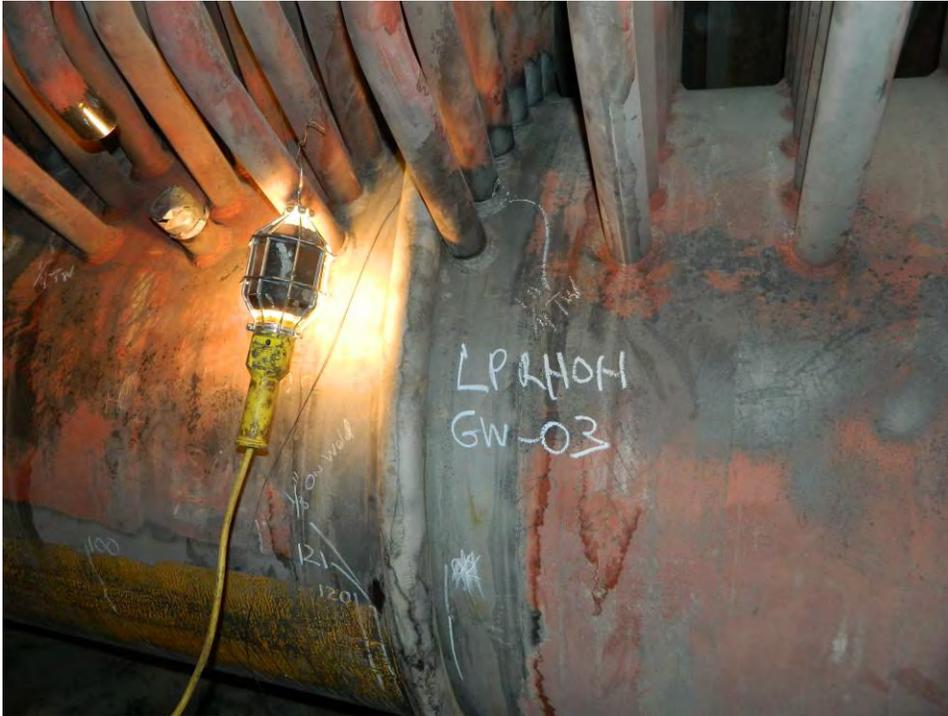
Photographs of the indications on girth weld No. GW-3 of the LP Reheat Outlet header.
